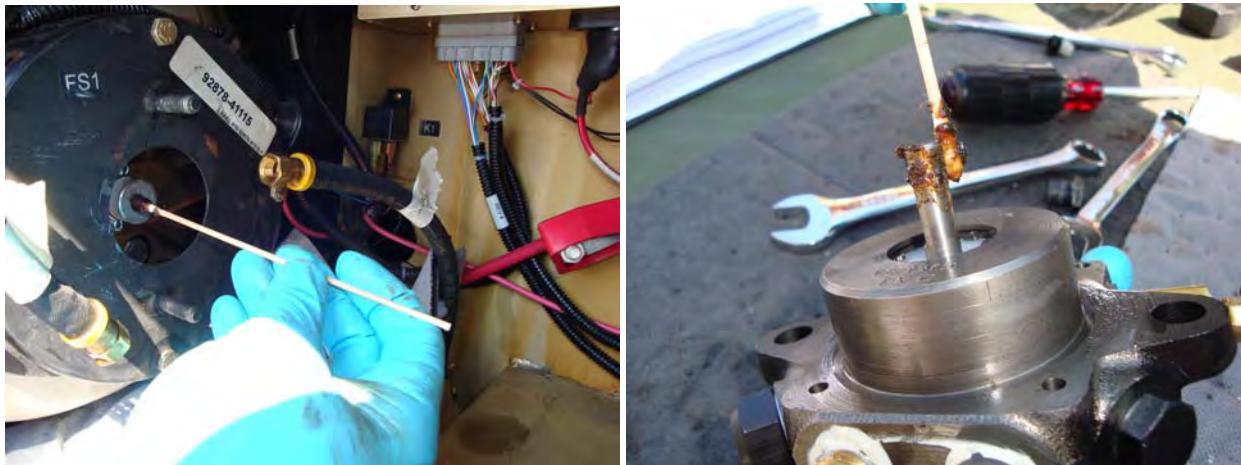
Apply Grease to Burner Fuel Pump and Pump Drive Coupling.
